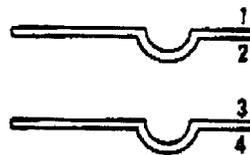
SURFACE IDENTIFICATION FOR TWO-SIDED COATING
